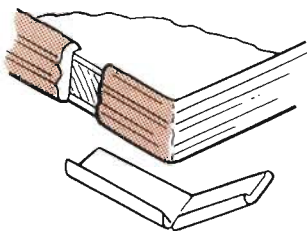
Types of edging: (a) solid wood edgings of manufactured boards, (b) flexible extruded plastic and metal edgings.
